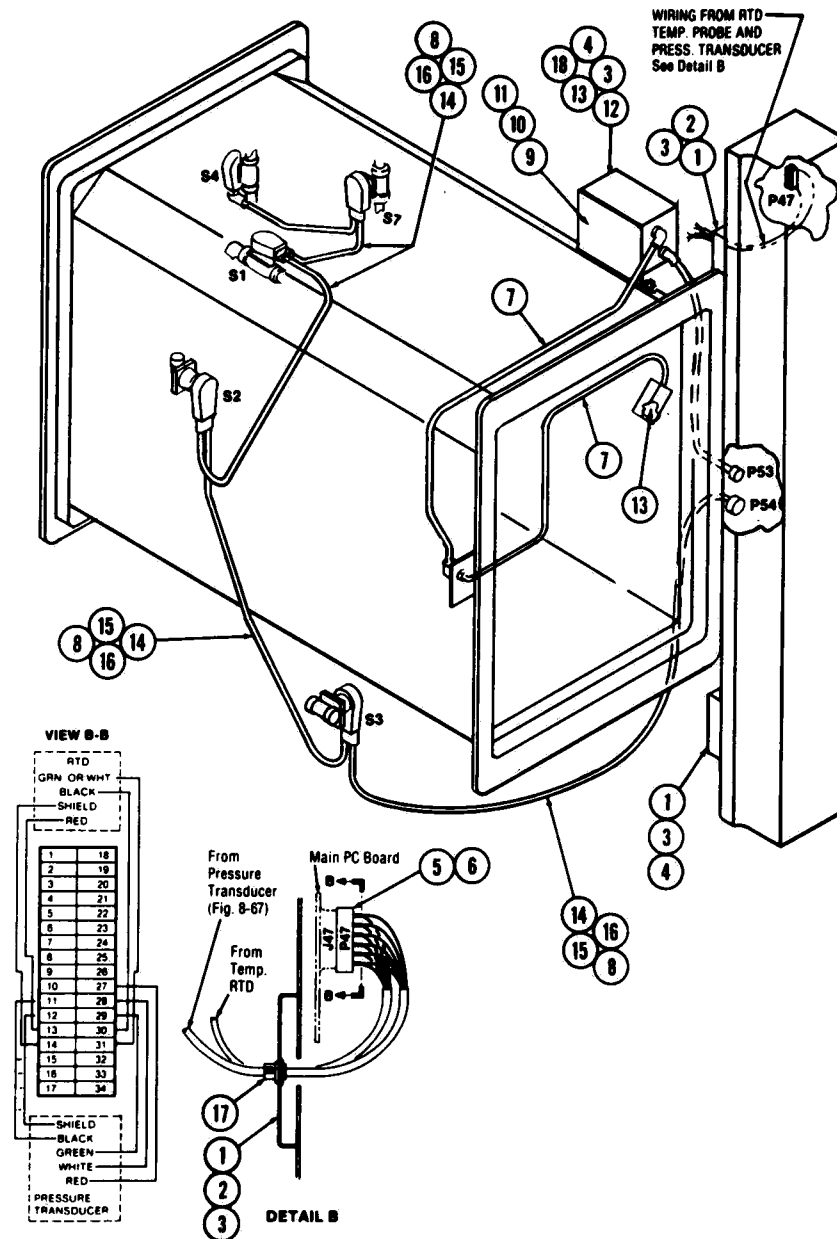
WIRING ASSEMBLY: Single Door Sterilizer with Printcon.
